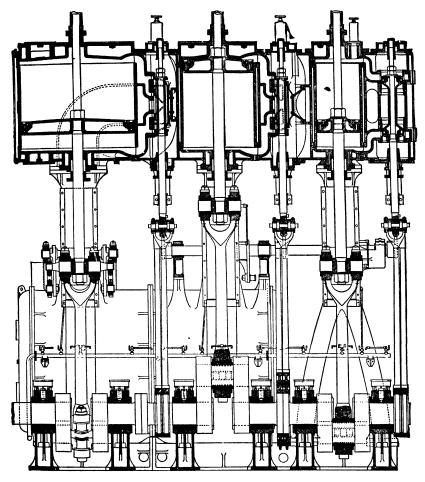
Sectional Elevation of a set of Triple-Expansion Engines.
